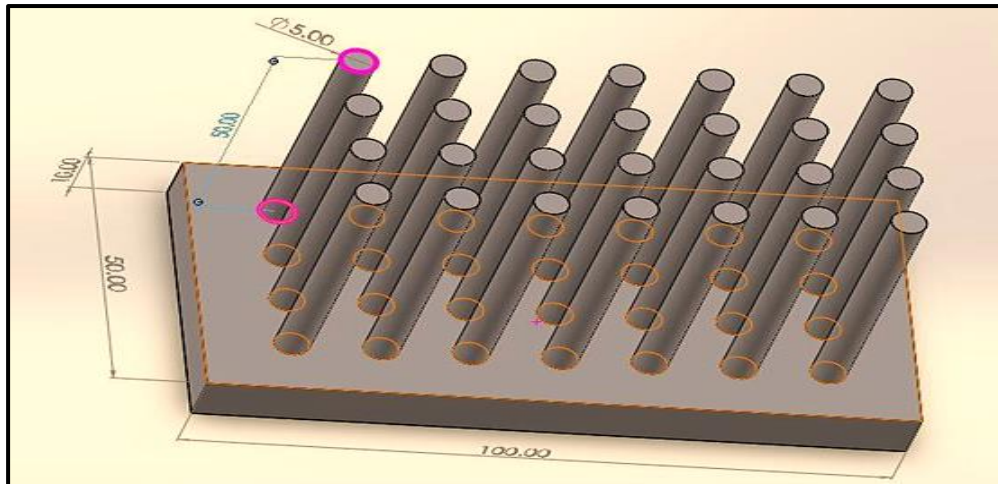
Top view of cylindrical fin, all dimensions in (mm).
